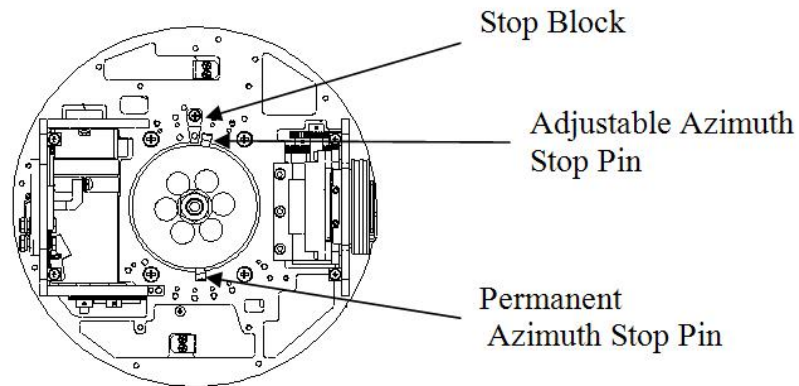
Bottom View of Gimbal showing Stop Block Pin and One Adjustable Stop Pin Installed
